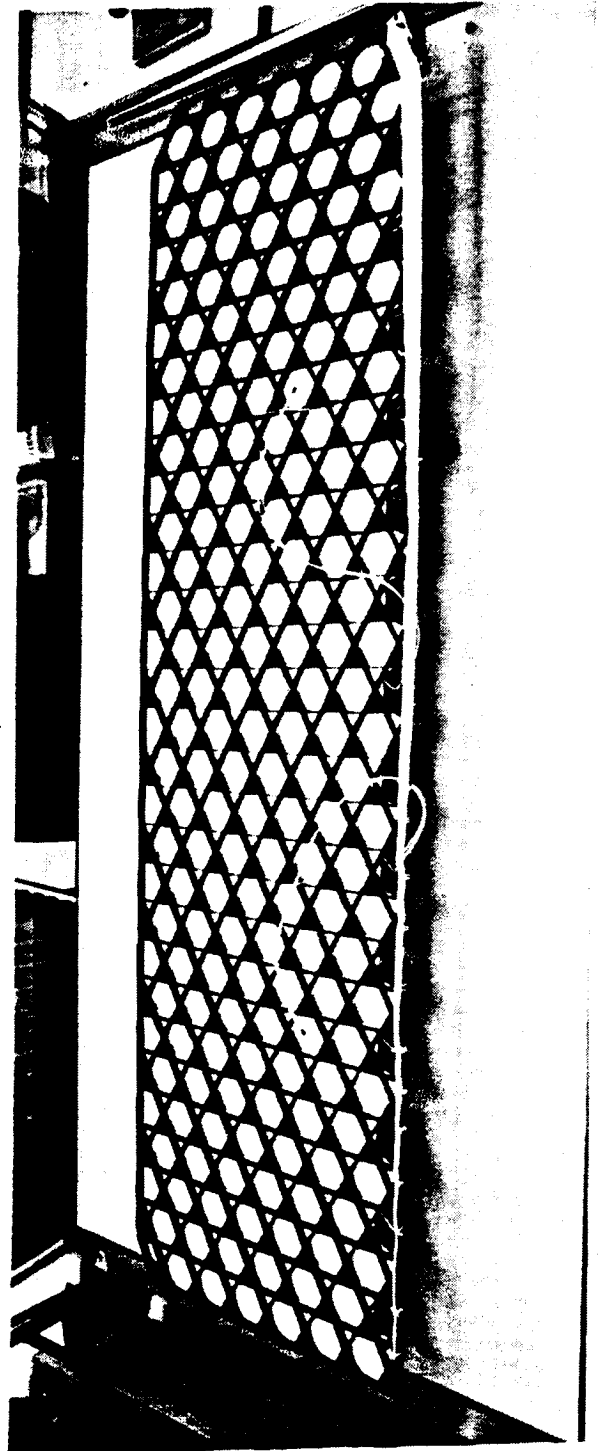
Back of Large Pa Showing Flat Cable Harness.
